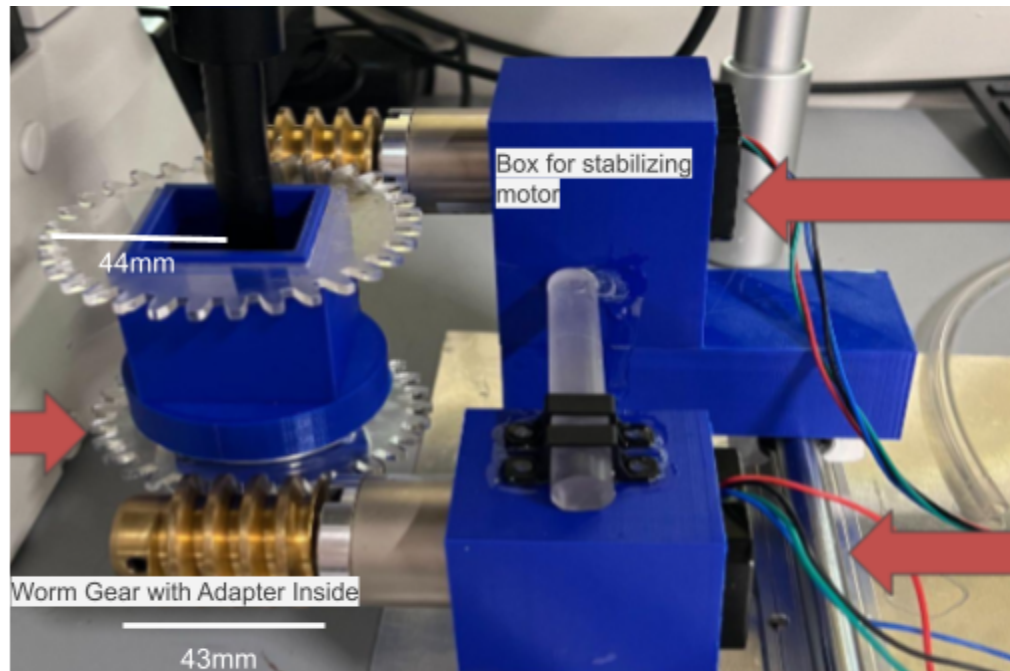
Preliminary Design 1 - Worm Drive Gear System
